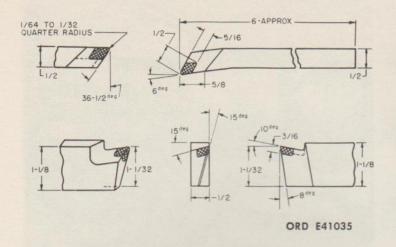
LATHE TOOL PROPERLY SHAPED FOR COMMUTATOR TURNING.
